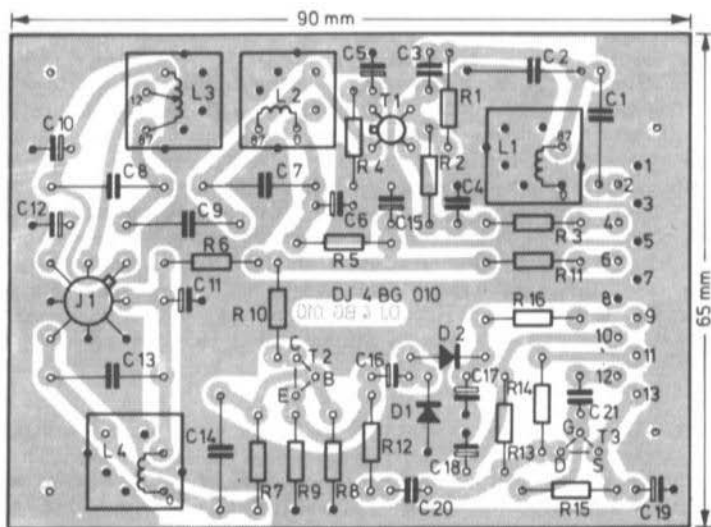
Printed circuit board DJ 4 BG 010 and components
